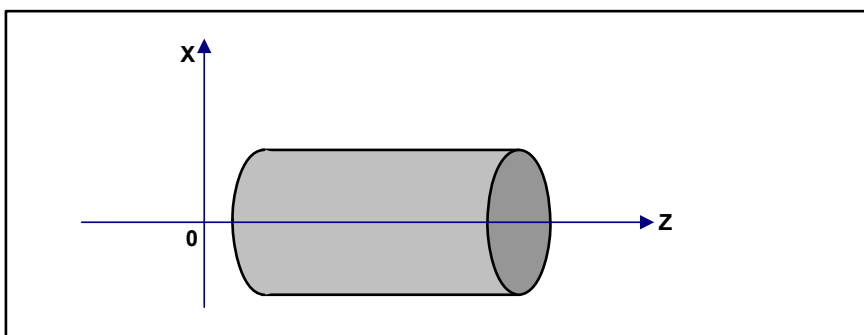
Workpiece coordinate system for constant surface speed control
